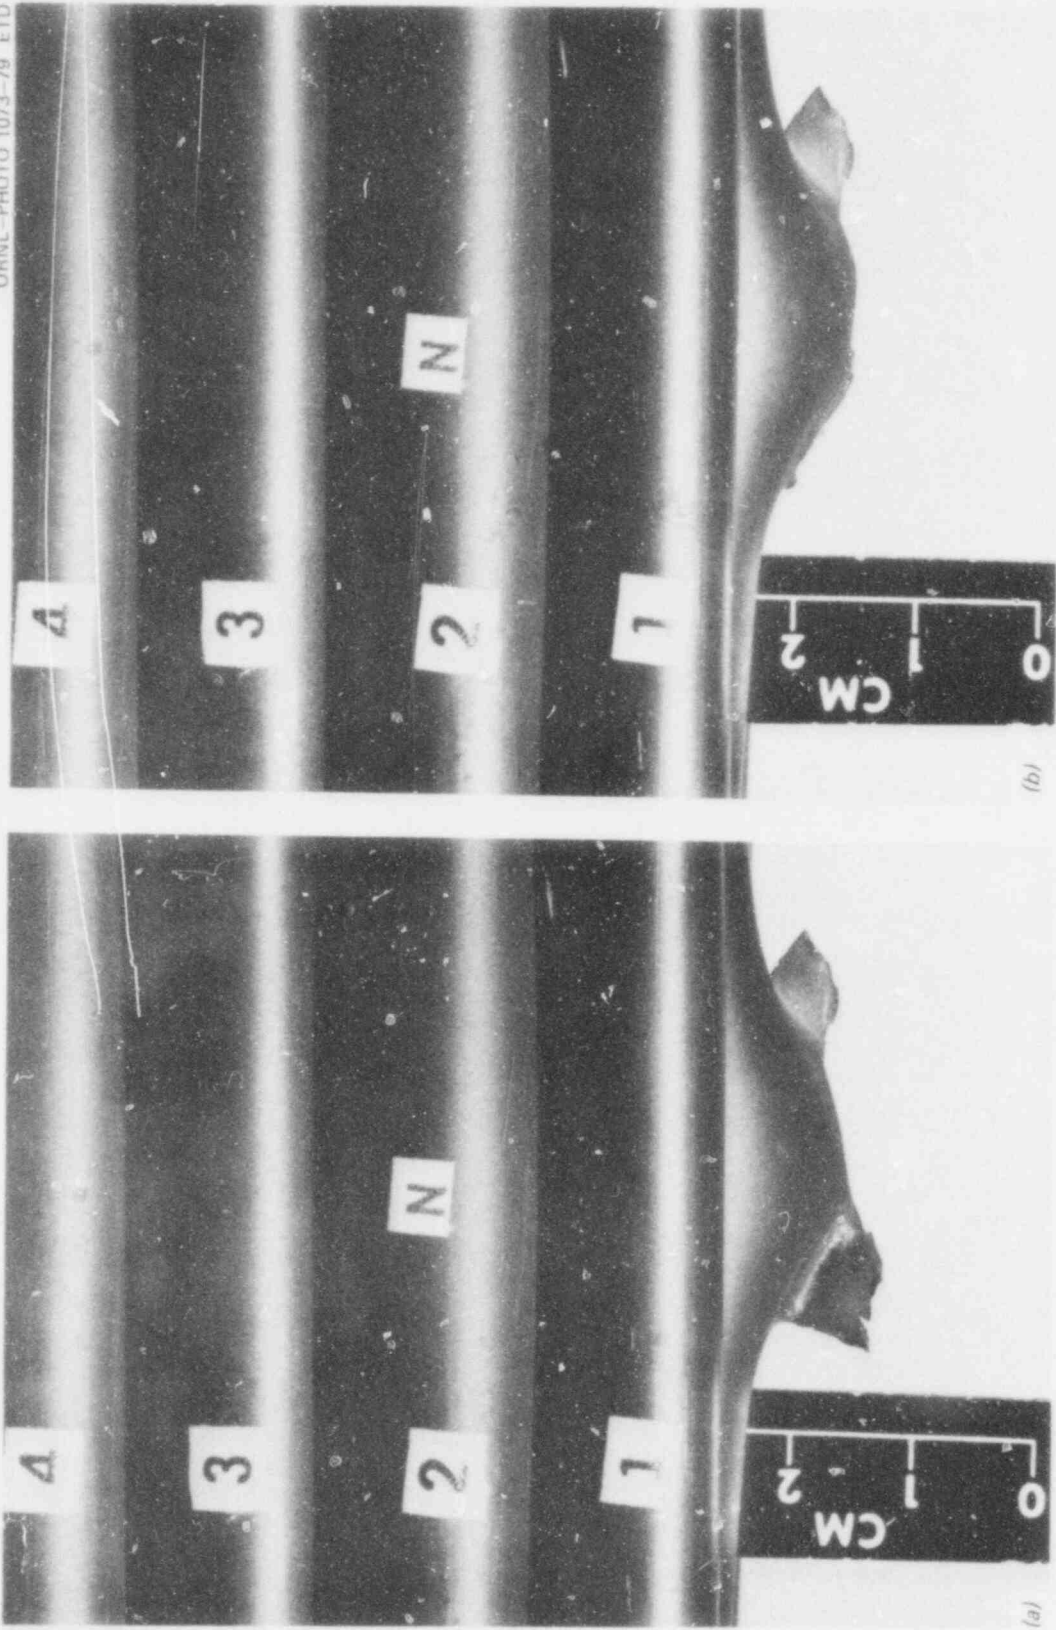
B-3, tube 5 burst flare-out before (a) and after (b) it was trimmed to fit into shroud 3 for flow tests.
